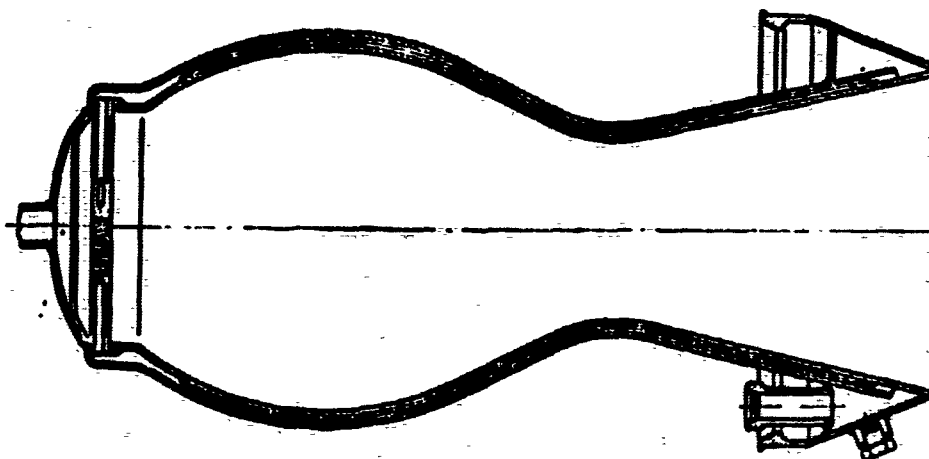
Pear-shaped combustion chamber with flat cap.
